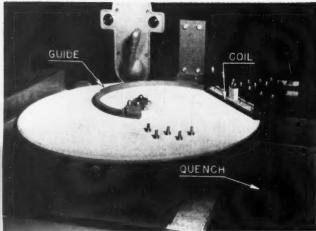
After screws are fed through the coil on this rotary table unit, they are dropped into a quench tank.
